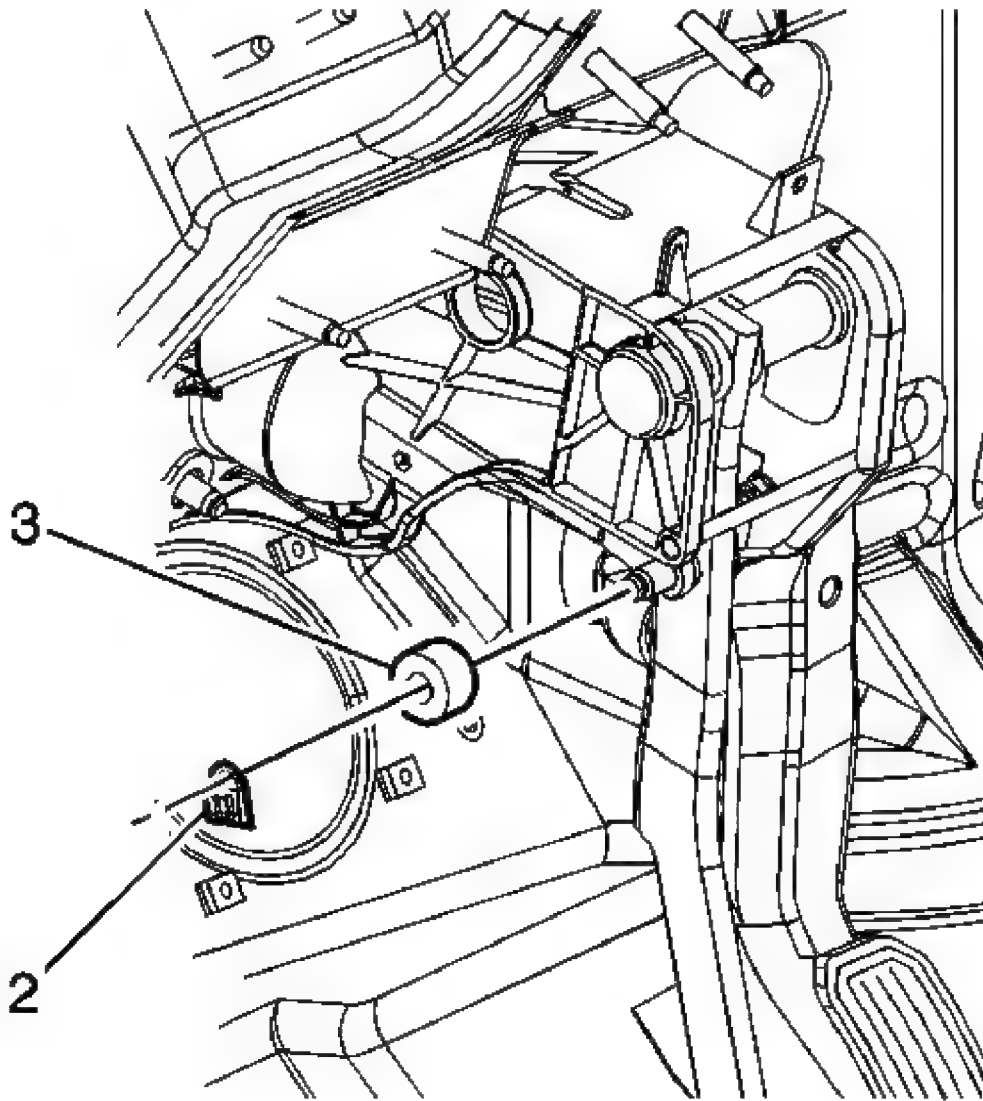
Identifying Brake Pedal Assembly Clevis Pin
